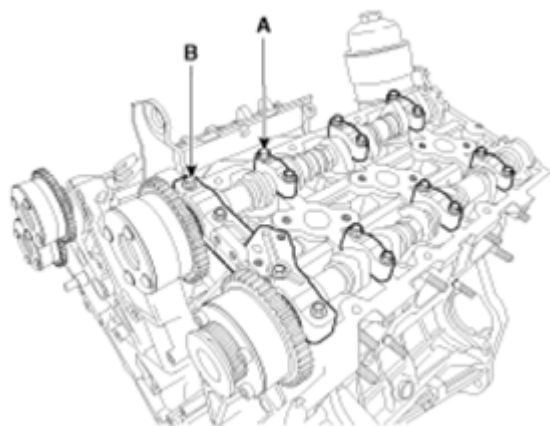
Identifying Camshaft Bearing Cap & Thrust Bearing Cap (1 Of 2)
